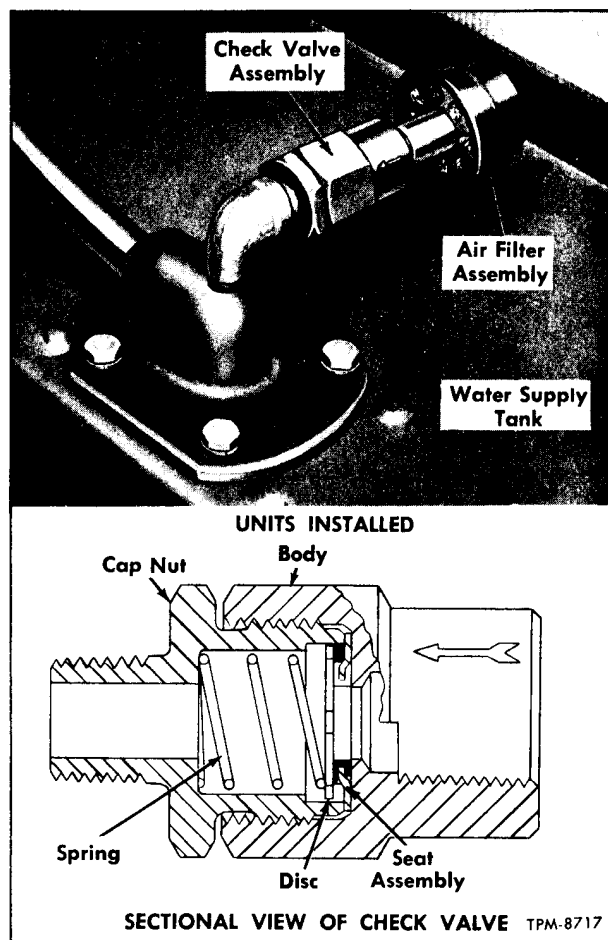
Water Supply Tank Air Breather and Check Valve Installed
